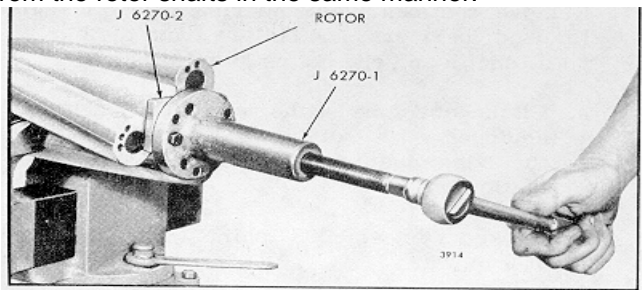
Removing Oil Seal Ring Carrier from Blower Rotor Shaft
